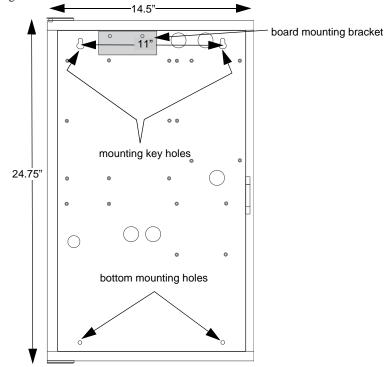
Cabinet Flush-Mount Dimensions and Mounting Hole Locations
